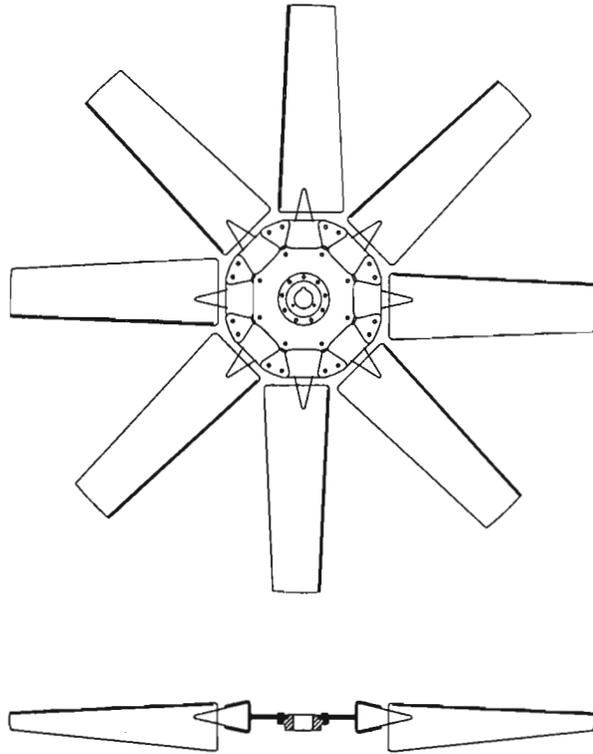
Eight-Bladed 7X Fan Assembly
